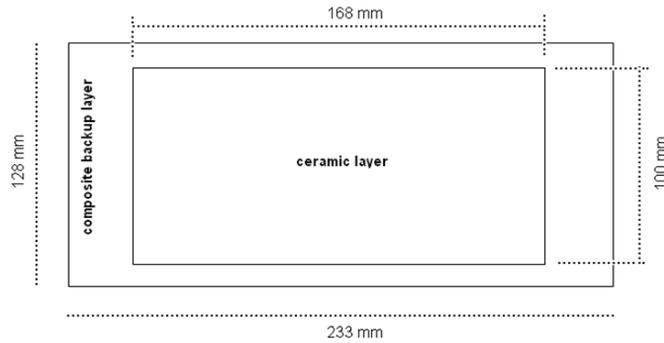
Geometrical dimensions of composite/ceramic compound armor used in the tests
